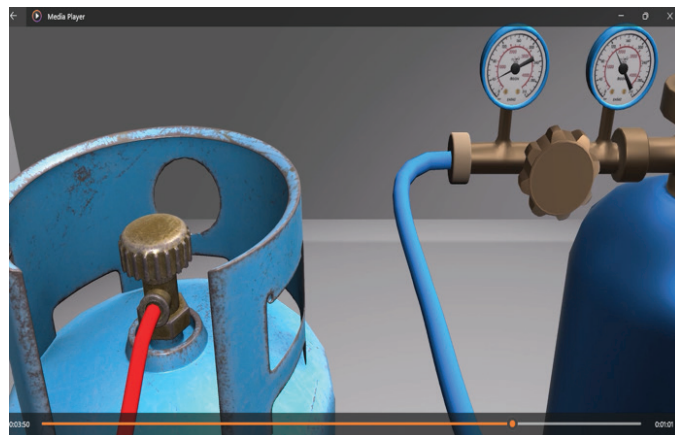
Illustration of gas cylinder valve and soldering iron ignition. Source: Compiled by the authors.
